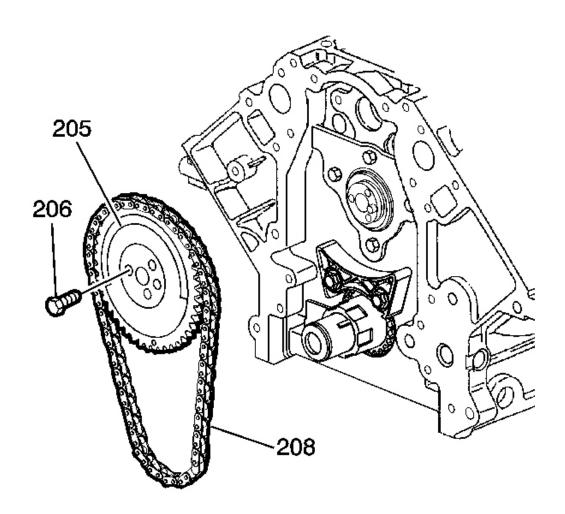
View Of Camshaft Sprocket, Bolts & Timing Chain Courtesy of GENERAL MOTORS CORP.
